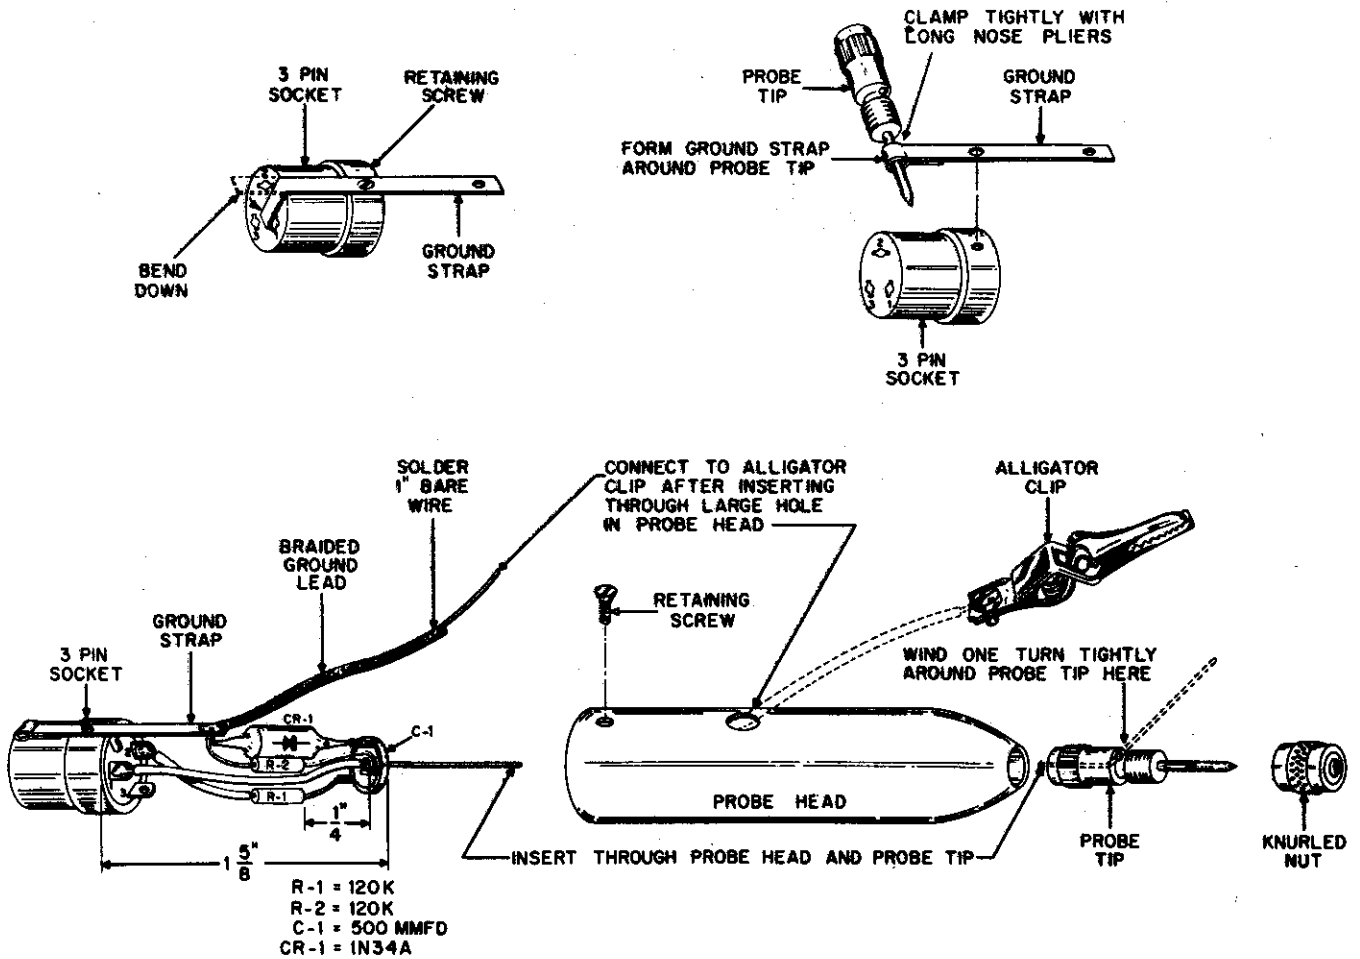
HOW TO ASSEMBLE THE PROBE HEAD
